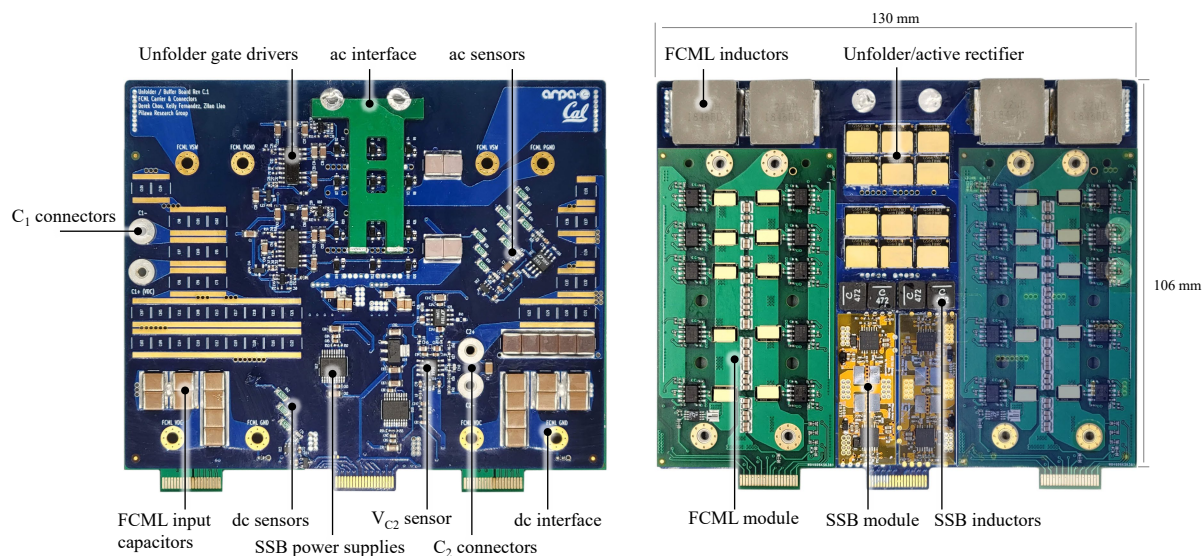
Unfolder/Buffer carrier board with core power conversion assembly stackup and detail.
